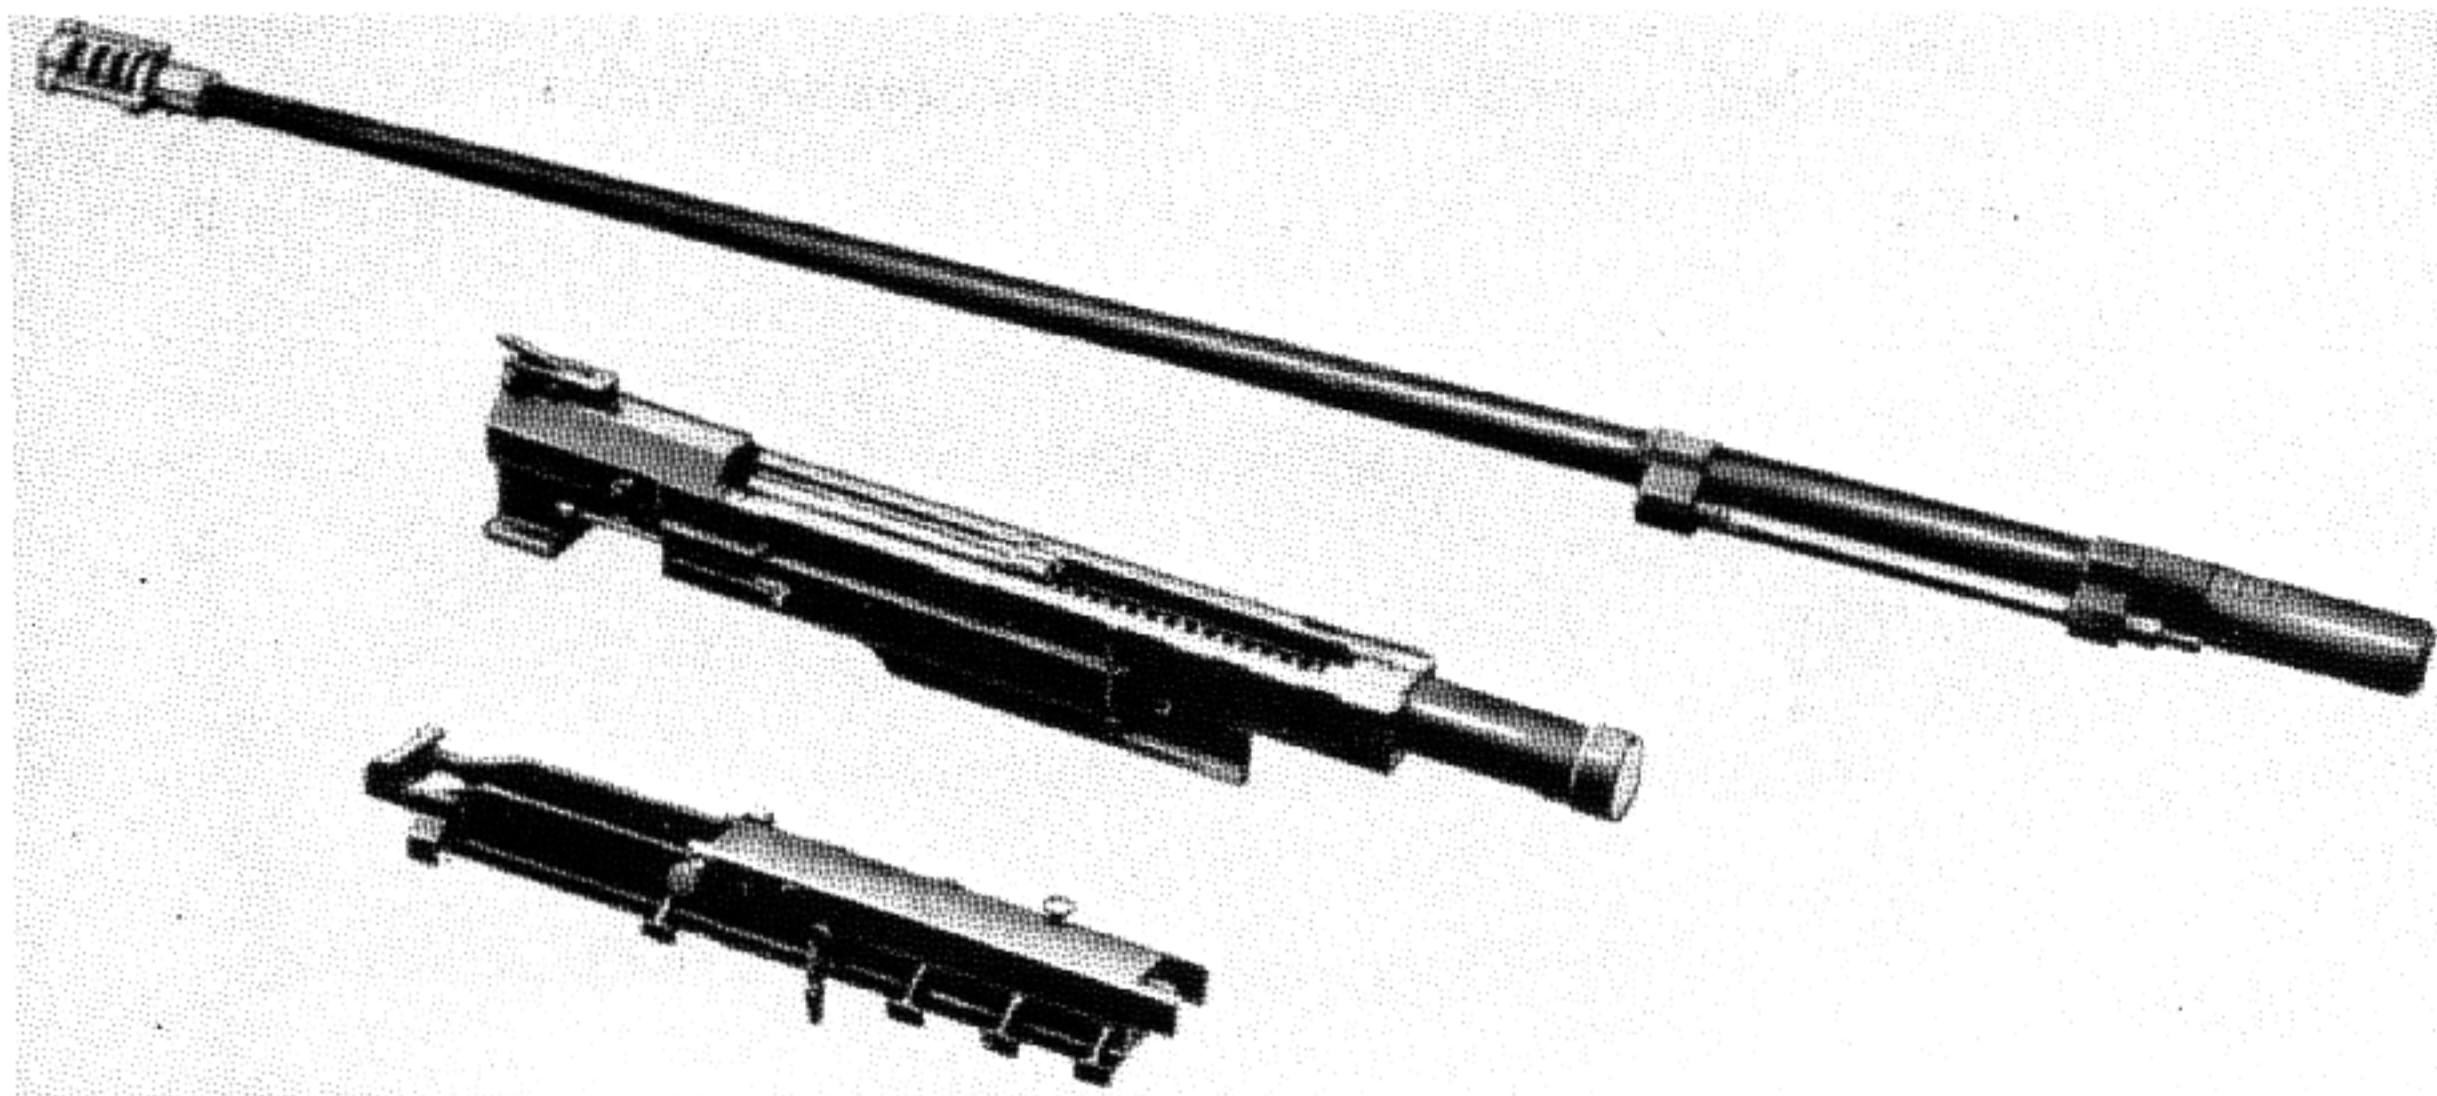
20-mm Automatic Gun 5TG, partially disassembled.
